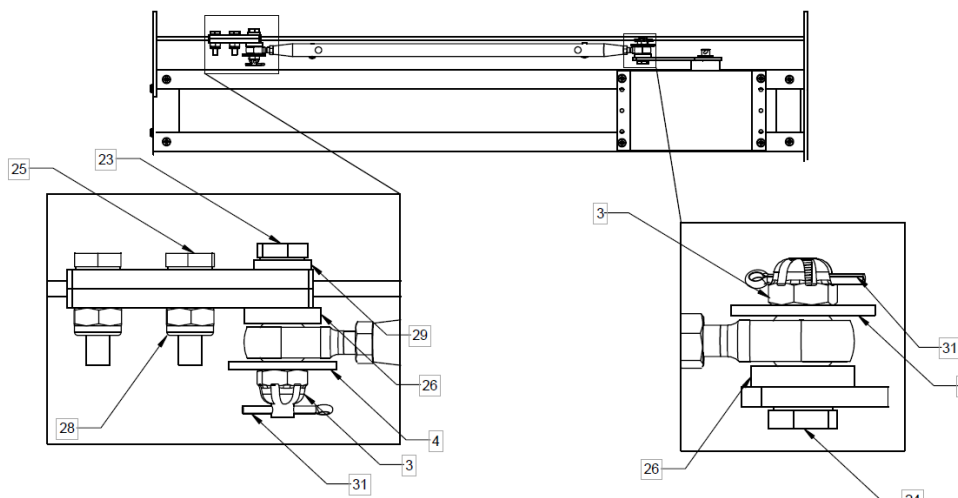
SERVO ARM AND CABLE CLAMP ASSEMBLY
